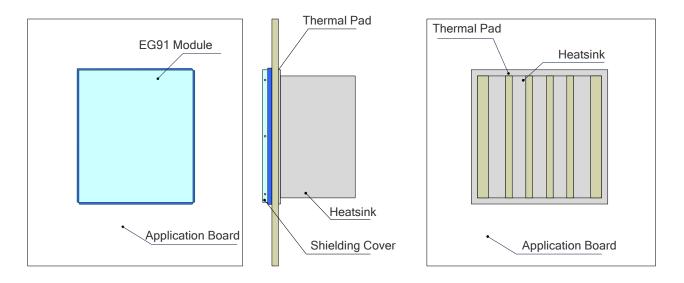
Referenced Heatsink Design (Heatsink at the Bottom of Customers' PCB)
